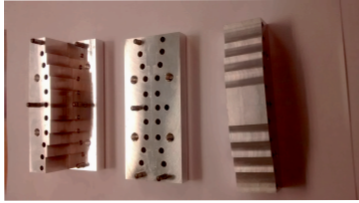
Photograph of the fabricated E-plane rectangular waveguide transformer.
